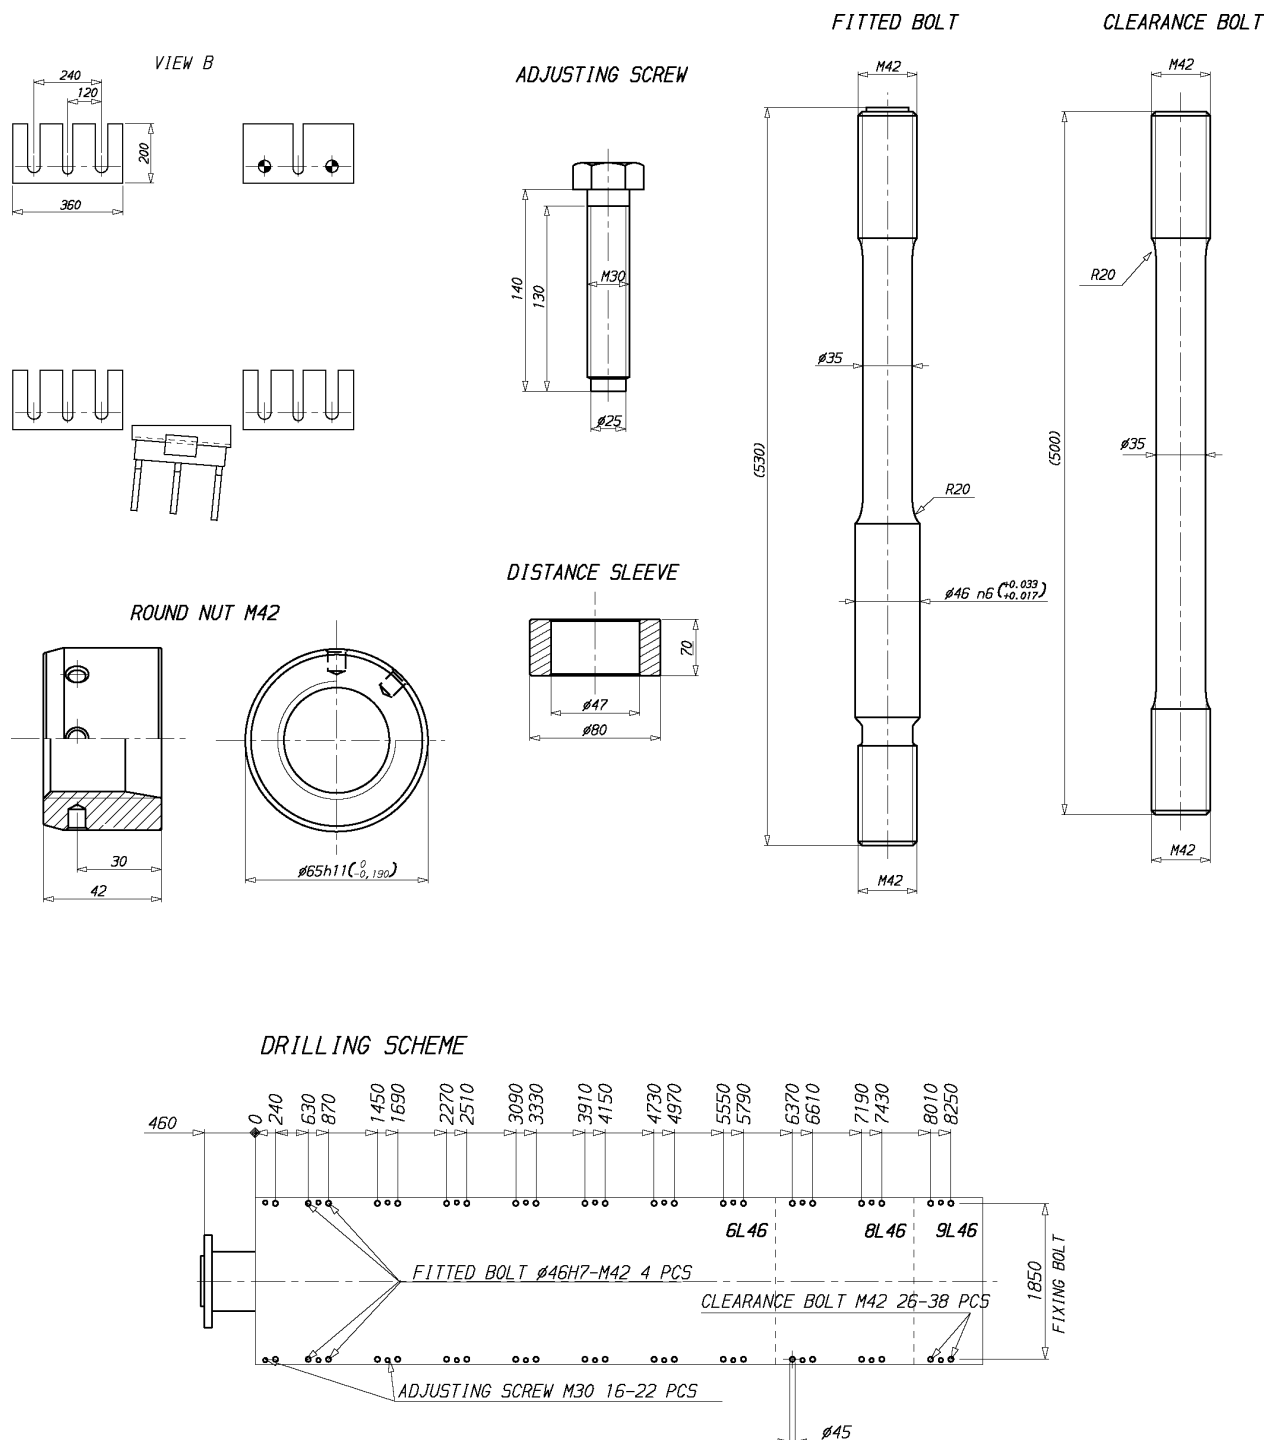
Seating and fastening, rigidly mounted V-engine on steel chocks (1V69L1659a)
